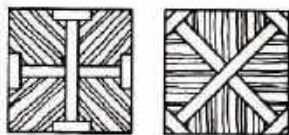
(C) HOW TO JOIN VENEER OF A CROSS JOINT
